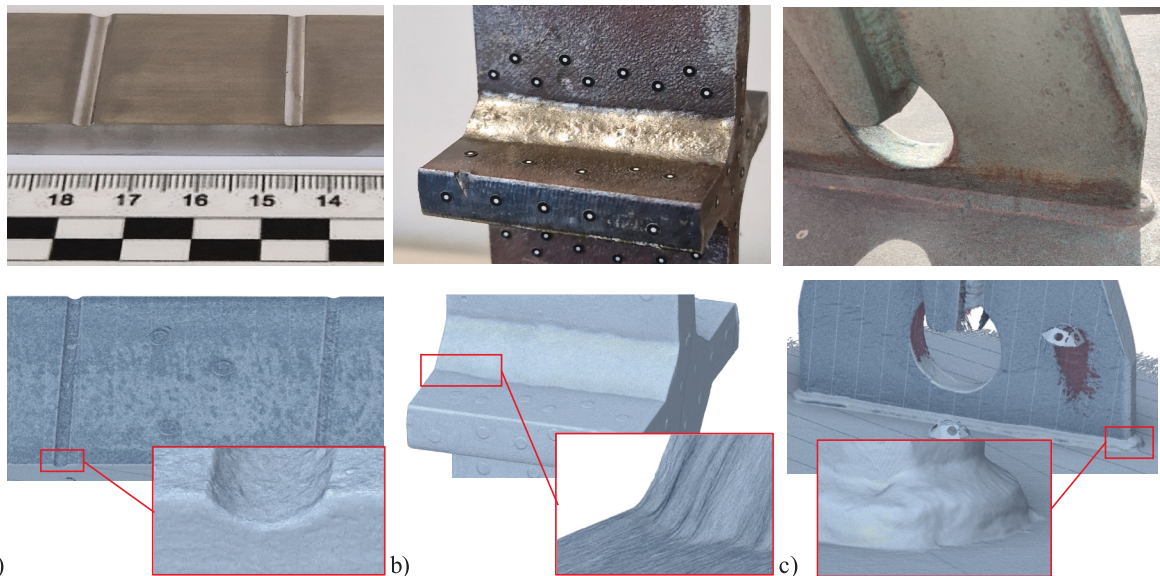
Exemplary 3D-scan data of test specimens: (a) ground notch radii with 2.5 mm radius and different notch opening angles, (b) transverse stiffener with fillet welds, (c) weld detail of a bridge hanger welded to the longitudinal girder.
